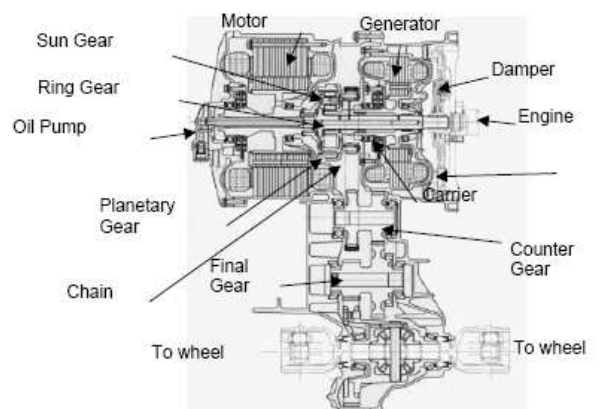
Motor, generator, and engine of Toyota/Prius hybrid THS II System.
